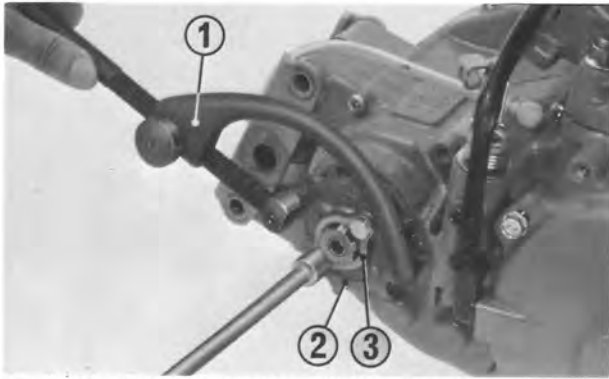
(1) Universal holder (2) Drive sprocket
